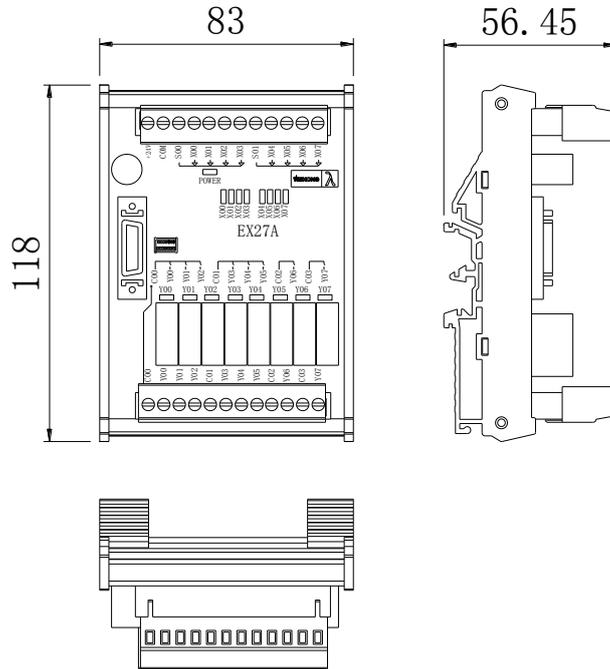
Mounting Dimension of Terminal Board EX27A3
